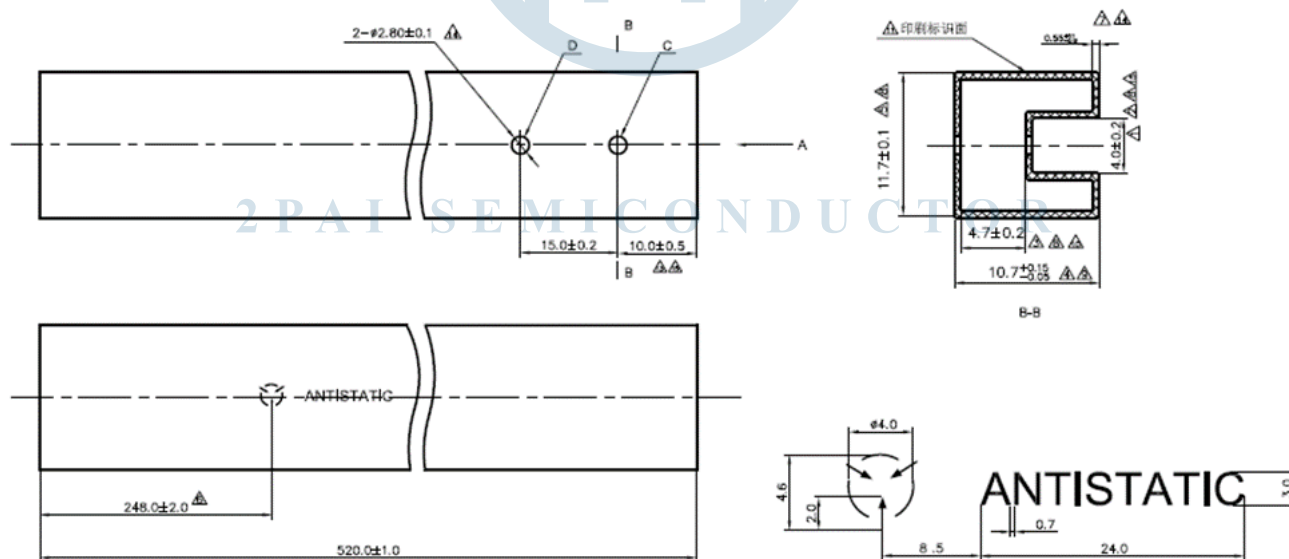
8-Lead DIP Outline Package [DIP-8] Tube Information
